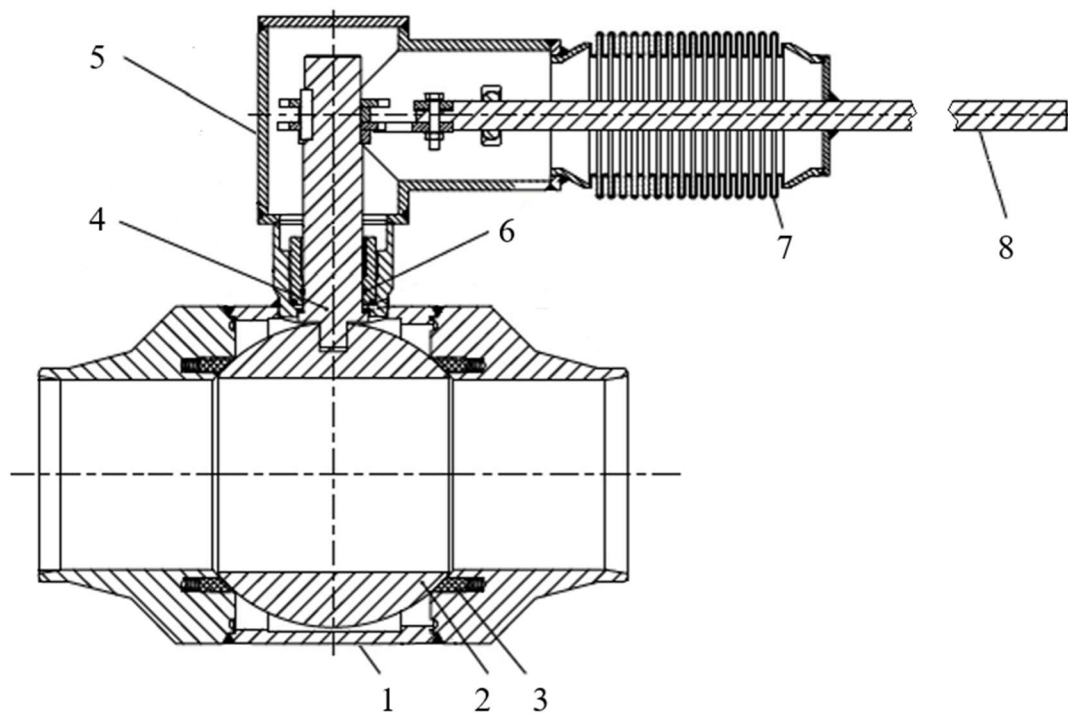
Sketch of investigated ball valve [4] of nominal diameter 100 mm with RGM constituent elements (Technical drawings and parts list - Appendix C):
